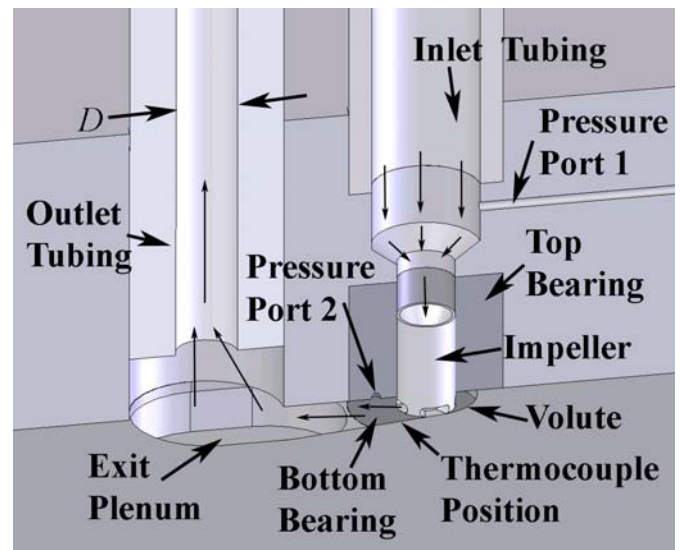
Cutaway view of the rotary shaft pump (RSP) assembly.
